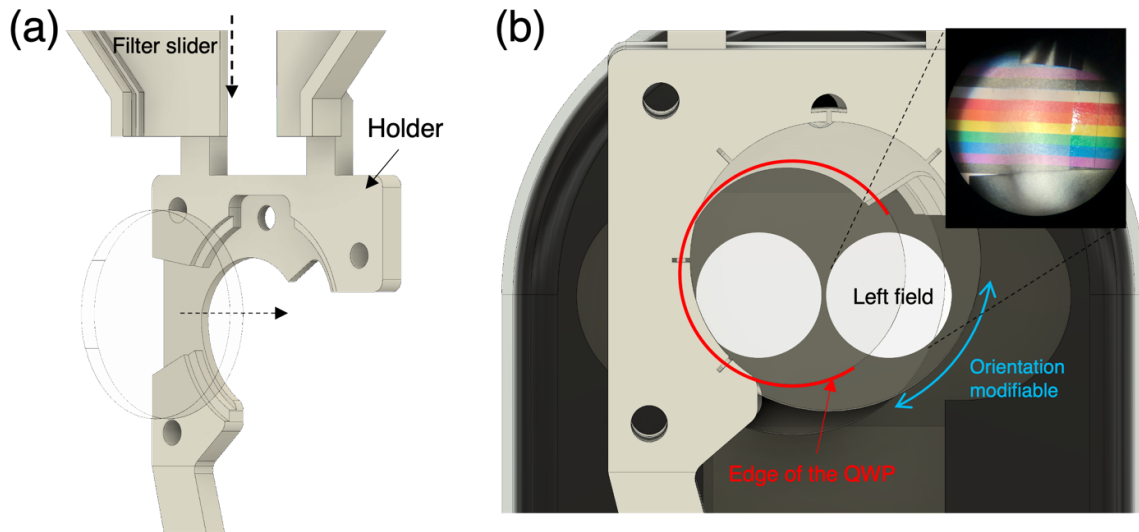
(a) The concept of the sandwich assembly for the FLCs and QWP of the PSG. The PSG’s optomechanics is characterized by the upper C-shape mount. Each filter is sandwiched by the 2 3D-printed components, called the cover and holder. (b) The front view of the holder. The cables from the FLC can be laid out in a stepped space around the edge of the filter so that it does not interfere with assembly. The opening at the top allows easy orientation of each filter.
